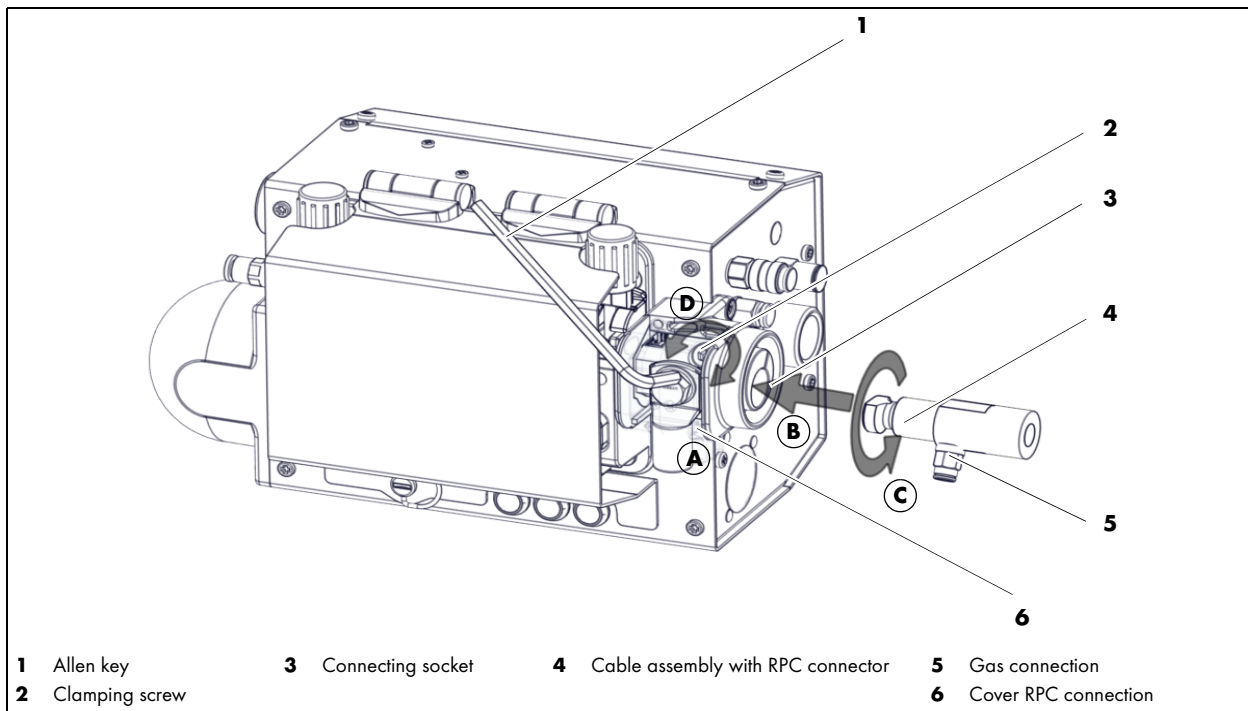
Cable assembly welding torch (RPC connection) iROB Feed 22 (version with the wire feeder mounted on the right)
